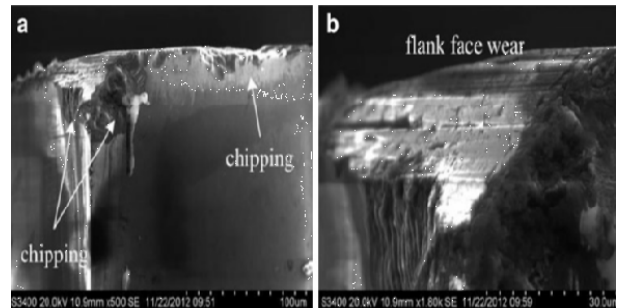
Damage to tools by Chipping⁽⁵⁾
